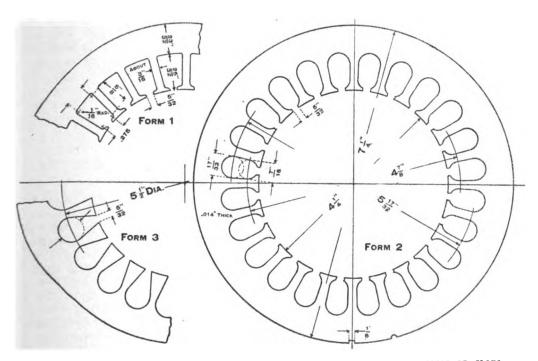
SHEET IRON FOR STATOR OF MOTOR SHOWING SEVERAL PRACTICAL FORMS OF SLOTS
